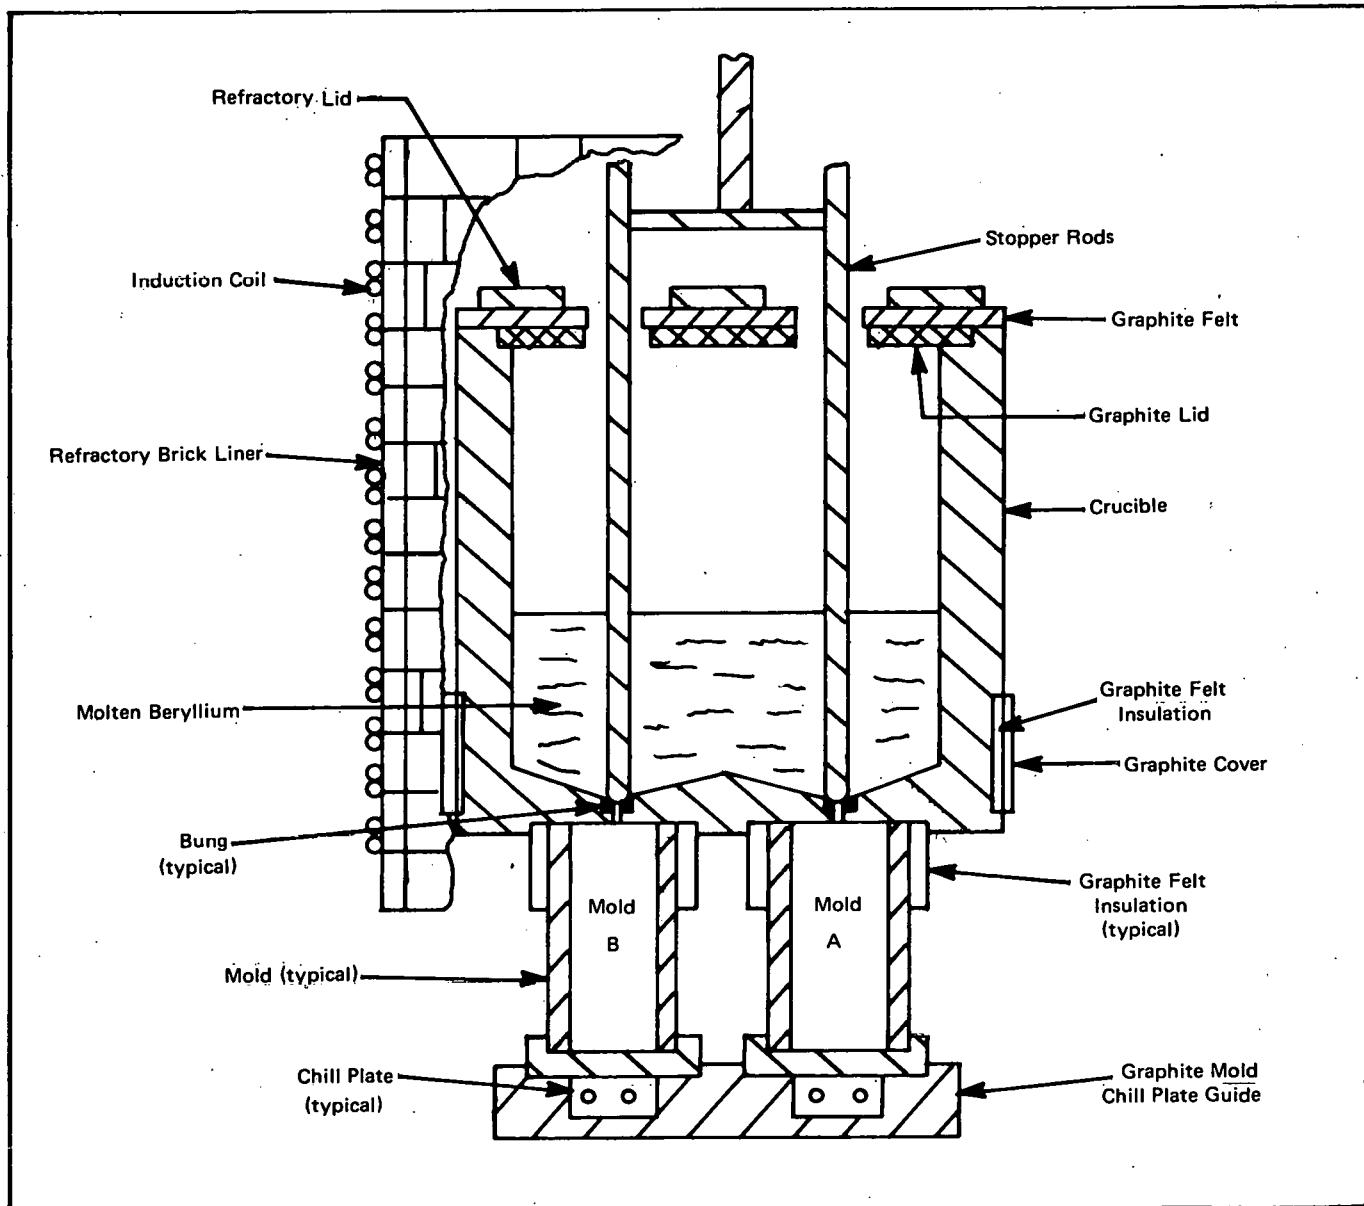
General Setup for Tandem Casting. Hot Tops Such as the One Illustrated in Figure 9 May Be Used in This Casting Operation.
